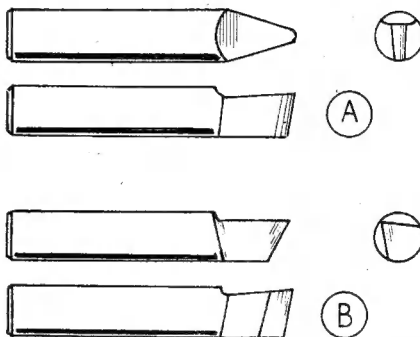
Fly-cutter tools. A, a front tool; B, a tool for undercutting a shoulder
